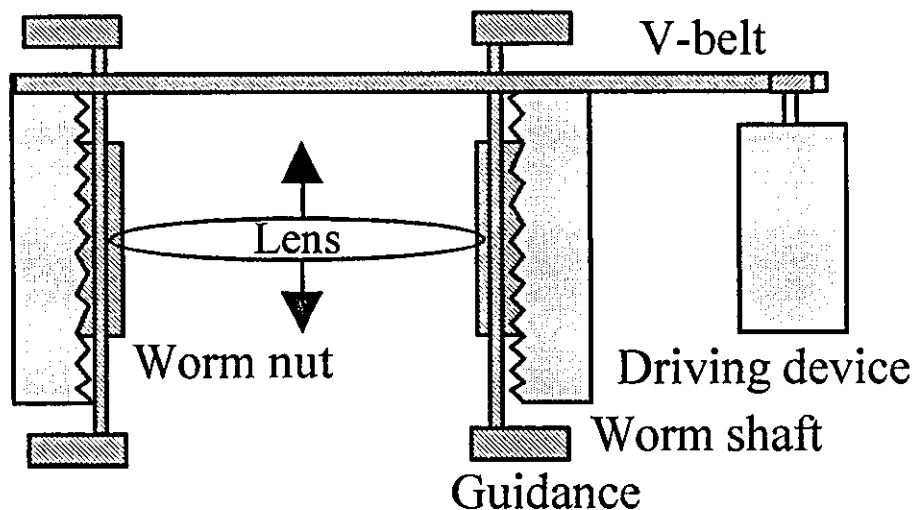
Principle of focus adjustment using a worm nut driven gearing
